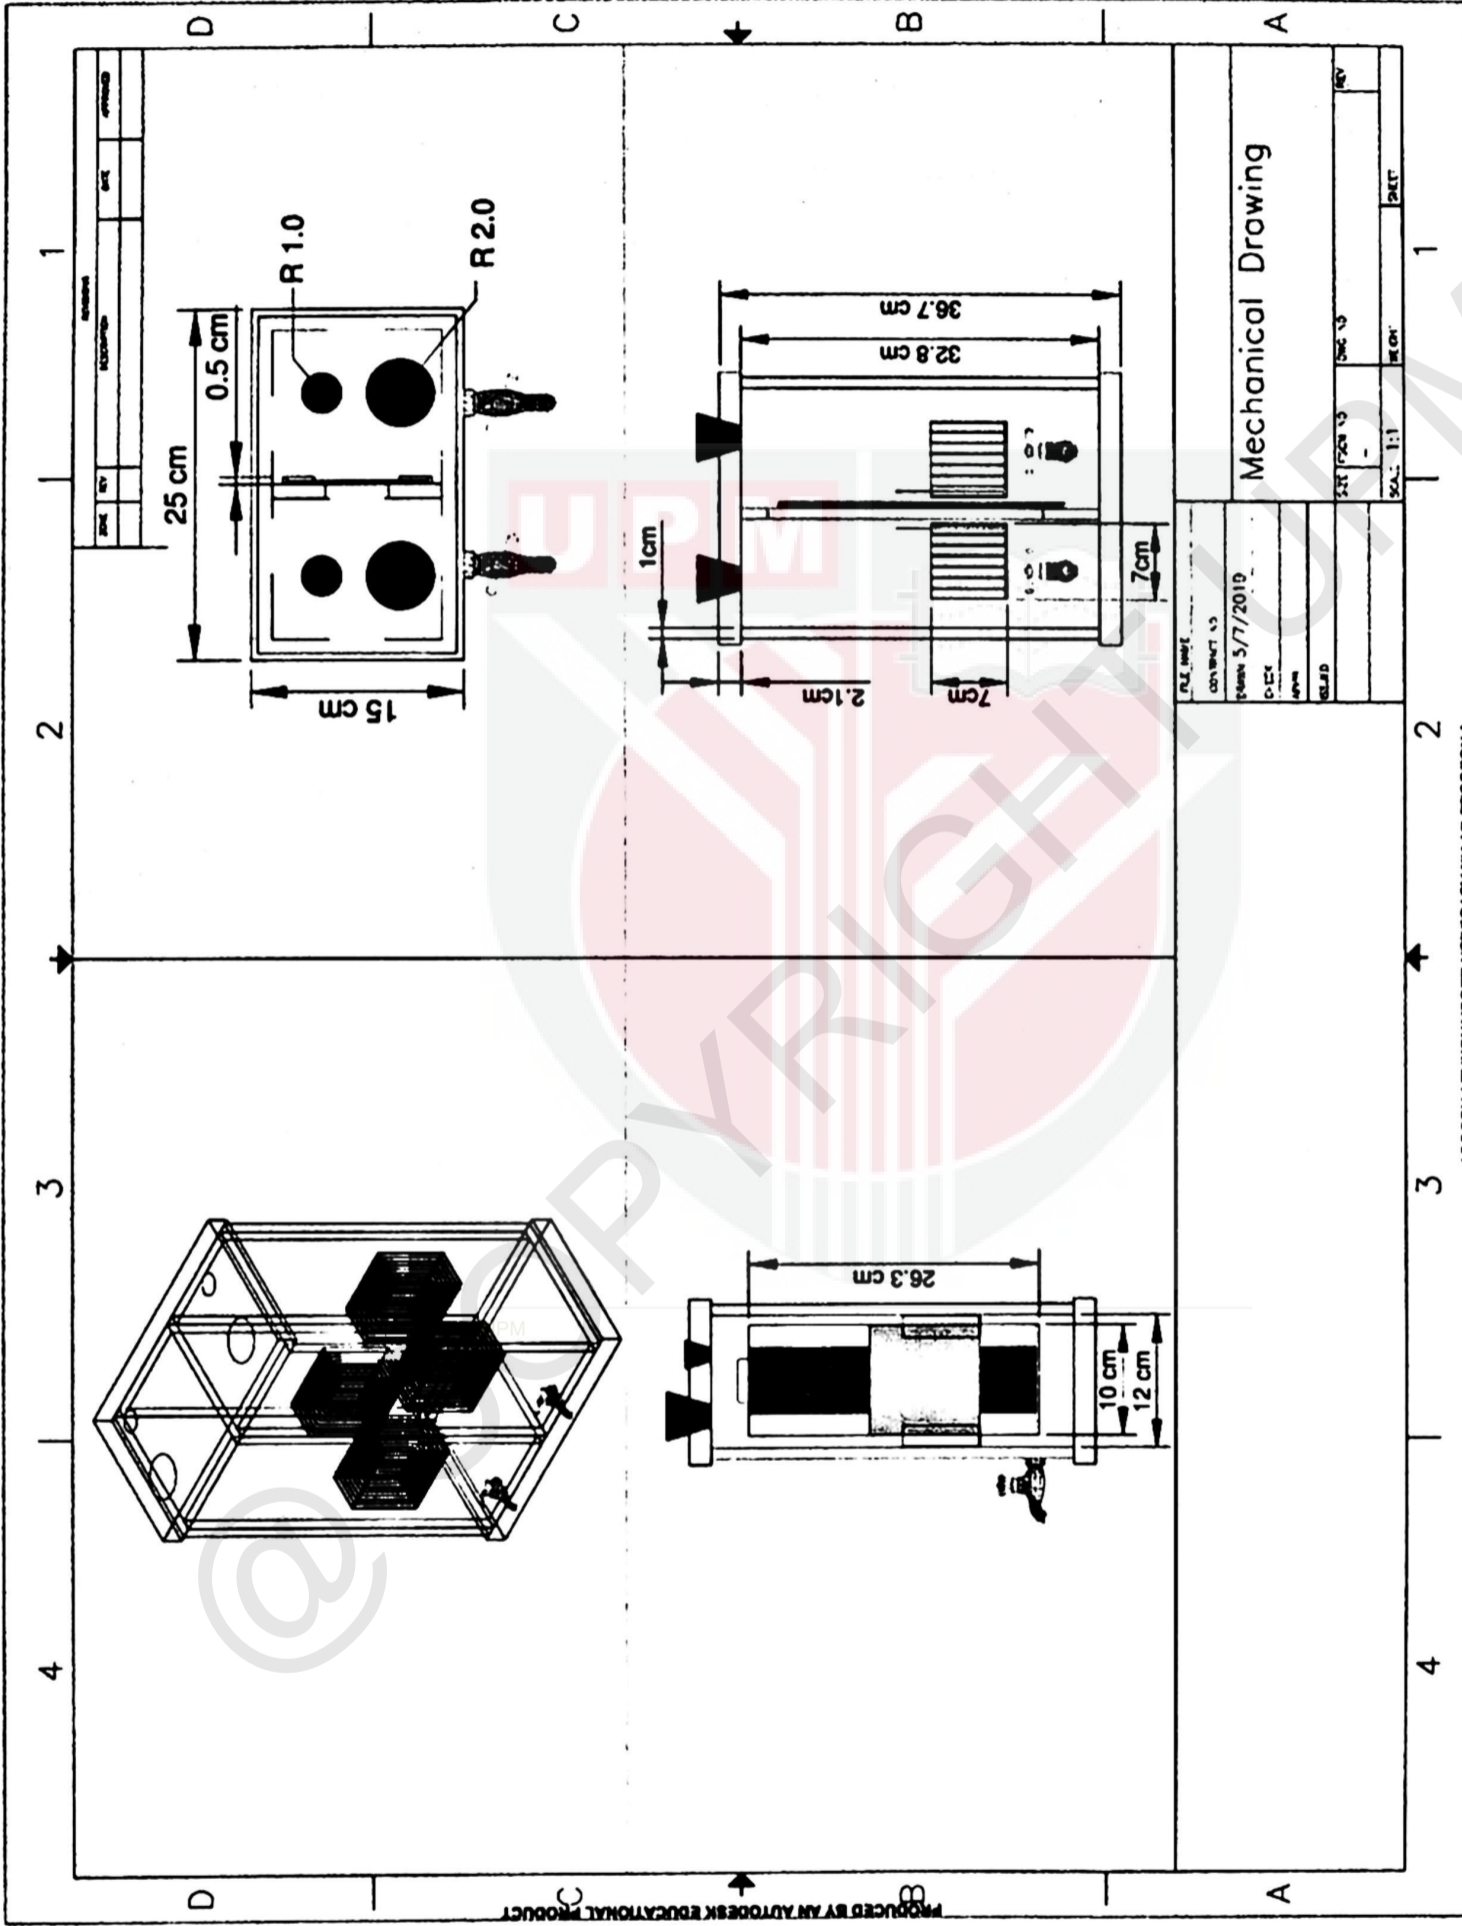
Mechanical drawing of existing lab scale electrolyzing unit
